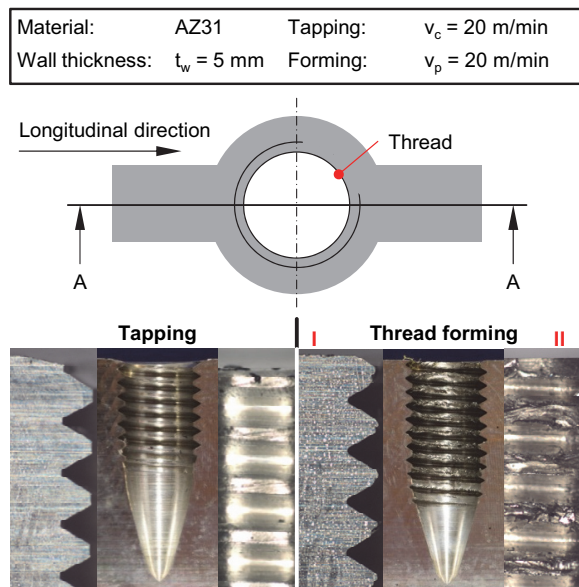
Section view of threads made with tapping and forming in a flow-drilled hole
